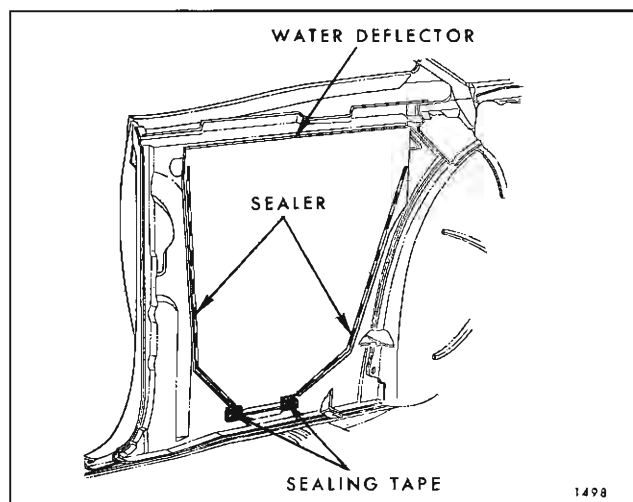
E15—Rear Quarter Inner Panel Sealing "37" & "57" Styles
